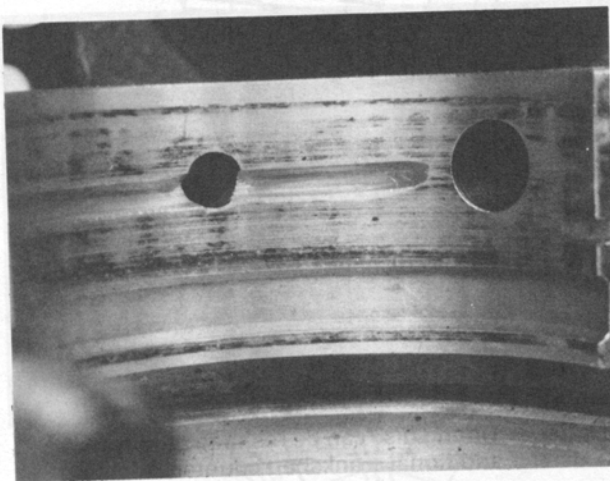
Groove in rear main bearing bore must not intersect large oil feed passage.
